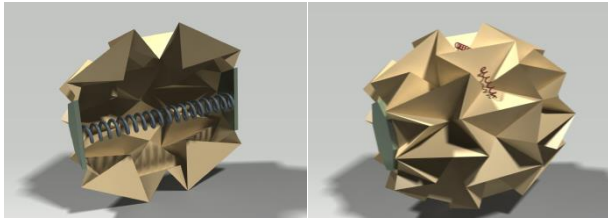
DESIGN OF THE WHEEL ACTUATING MECHANISM. THE ACTUATION OF THE WHEEL REALIZED USING PASSIVE SPRING (LEFT) AND SHAPE MEMORY ALLOY COIL SPRING ACTUATOR (RIGHT).
